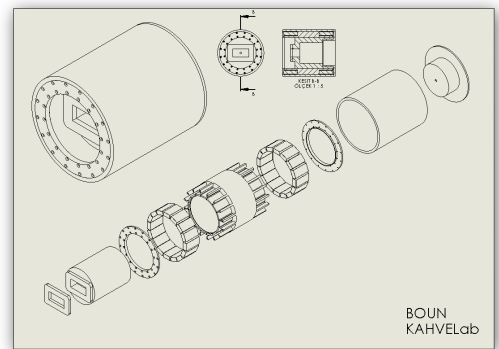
Technical drawings of permanent ring magnet and plasma chamber design for MDIS.
